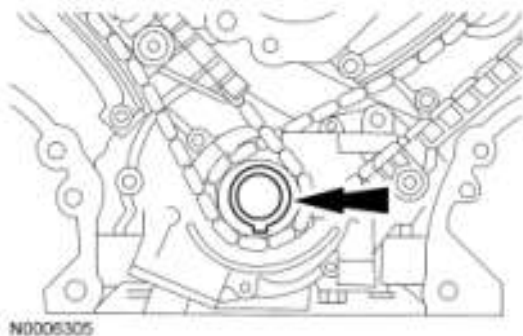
Crankshaft Positioned With Keyway At 6 O'clock Position
